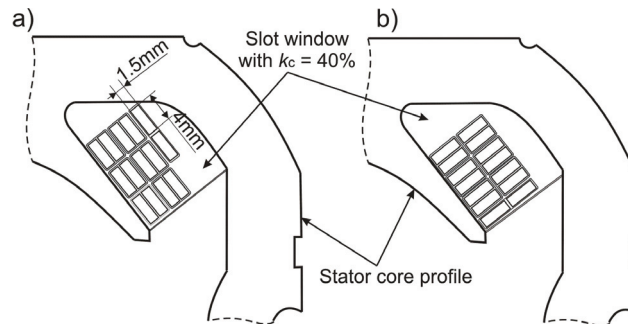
Outline of the rectangular winding. Winding configuration with strands located perpendicularly with higher edge facing to tooth – version VIII (a) and located radially with higher edge facing to tooth – version IX (b)
